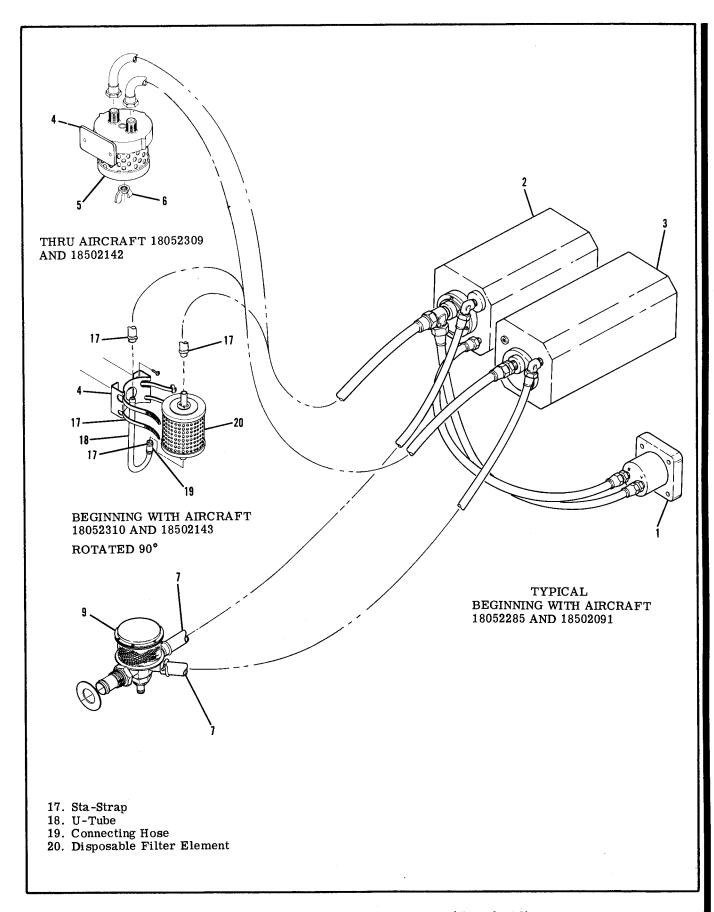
Engine-Driven Vacuum System(Sheet 2 of 2)
